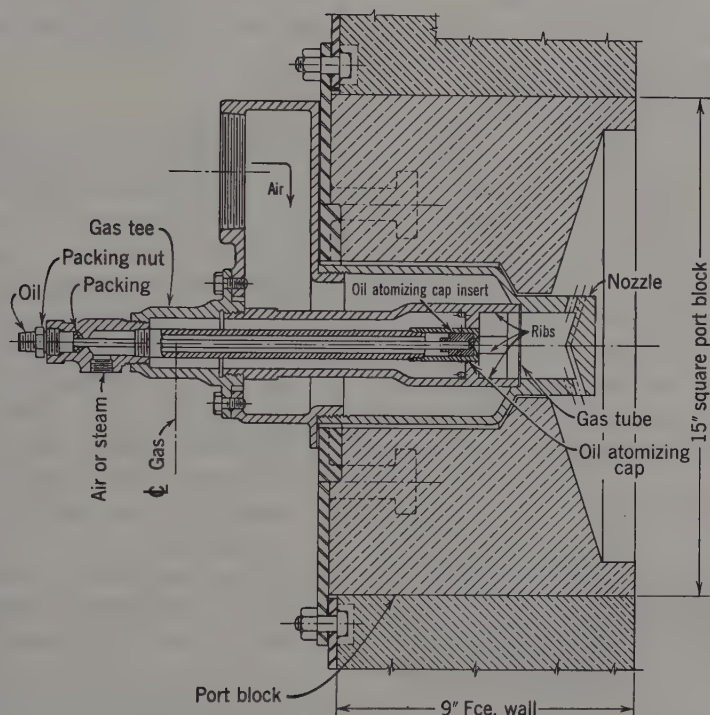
Burner with rapid combustion of gas. Courtesy of Bloom Engineering Co.
